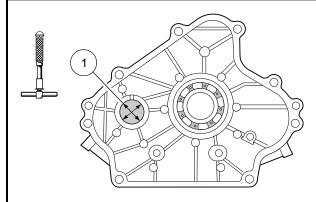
Inspect Camshaft Surface in Crankcase Cover
